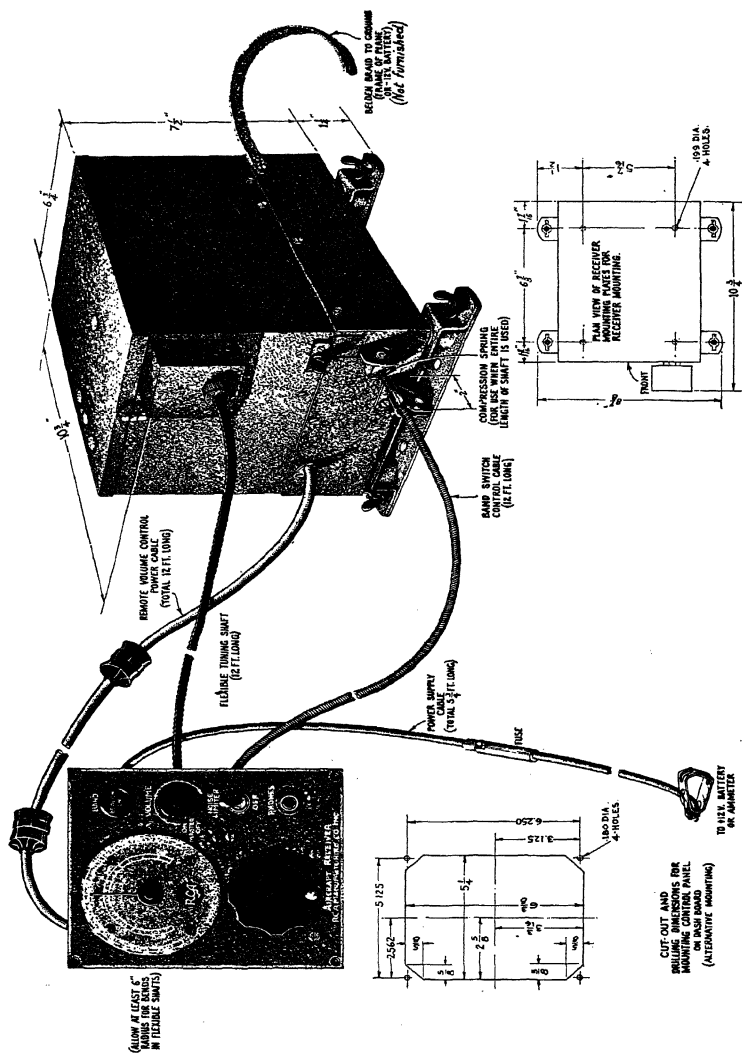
D. MOUNTING DETAILS OF AVR-7-B AND AVR-7-C RECEIVERS
